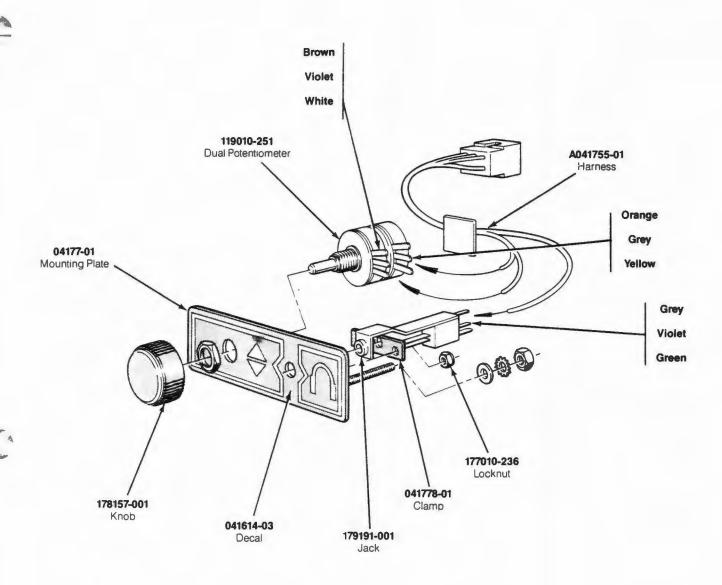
Audio Jack Assembly A041776-01 A Parts List
